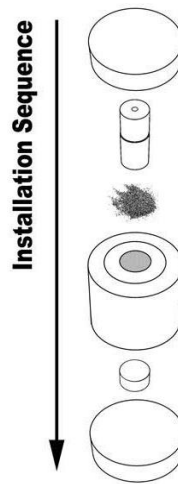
Pressing assembly for the obtaining of the pre-form [53].
